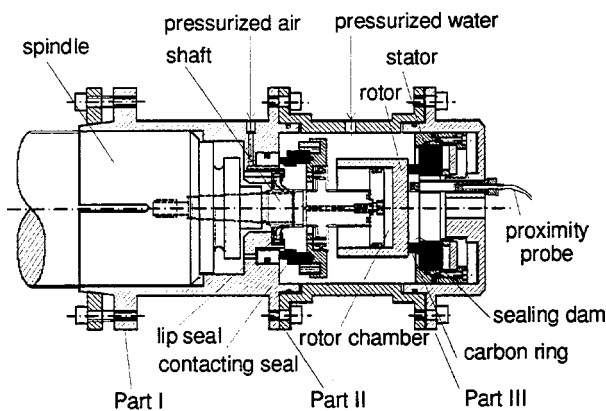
Schematic of the FMR noncontacting mechanical seal assembly
